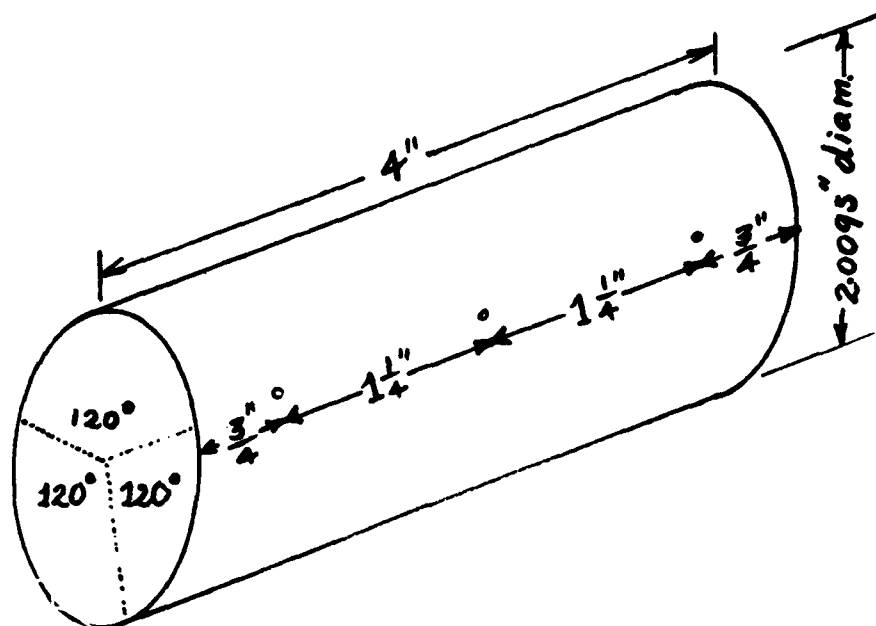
LOCATION OF BEARING THERMOCOUPLES
